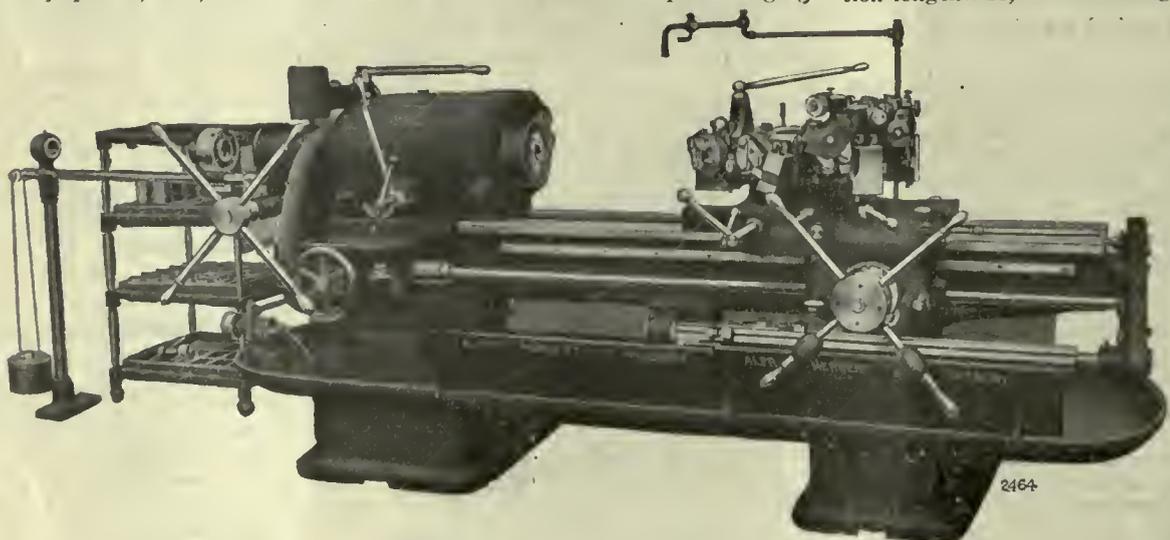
GENERAL VIEW OF THE BAR TYPE MACHINE.
